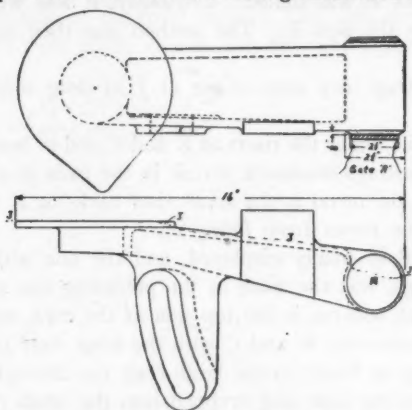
WEIGHT OF CASTING 26 POUNDS
